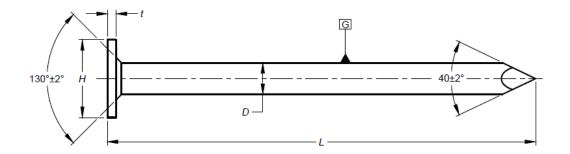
DIMENSIONS (CABLE CLIP CONCRETE NAILS)
